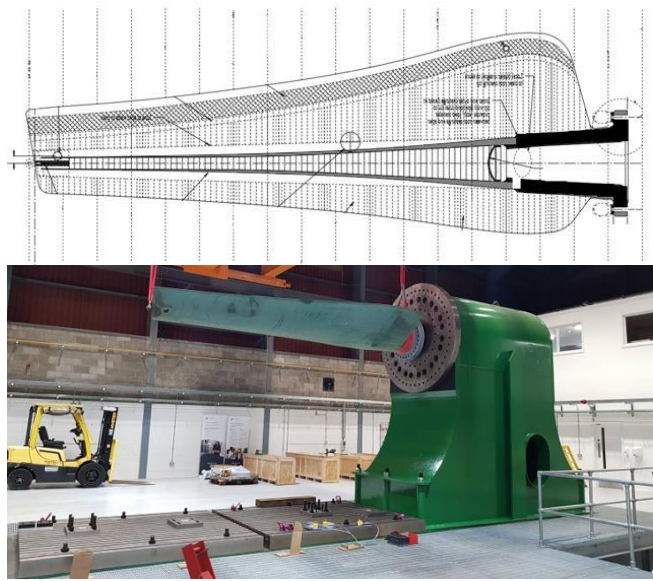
Technical Drawing of the Test Blade Looking from the Top View [25] and the original blade [12-13].
